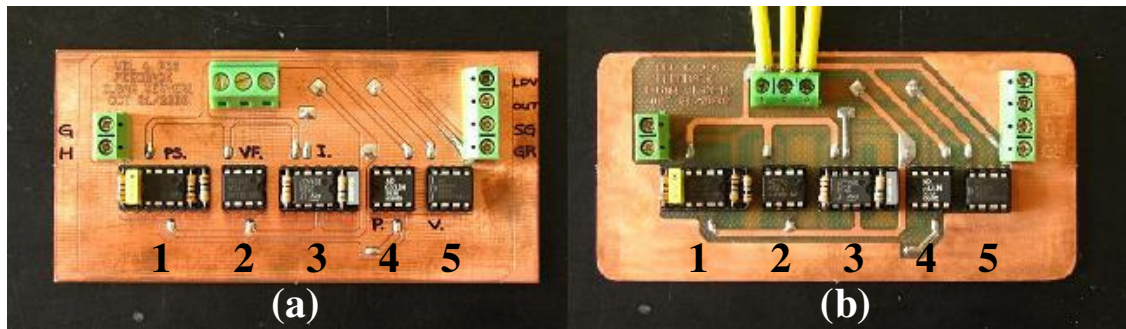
(a) The original PCB, (b) the engraved PCB.
